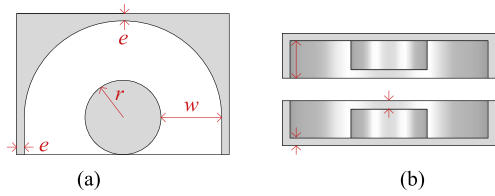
Core dimensions definition. (a) Top view (only one piece of a pair is shown). (b) Side view.
